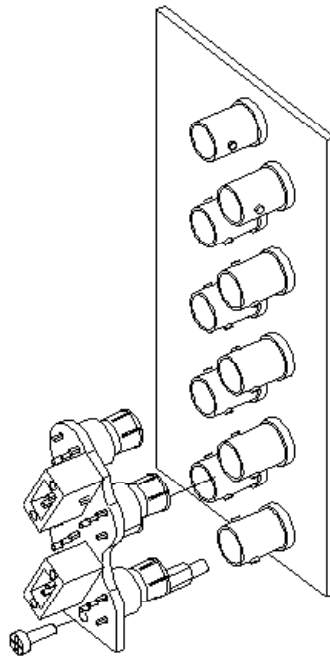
K500AMDA-IO Rear Panel Adapter Installation
